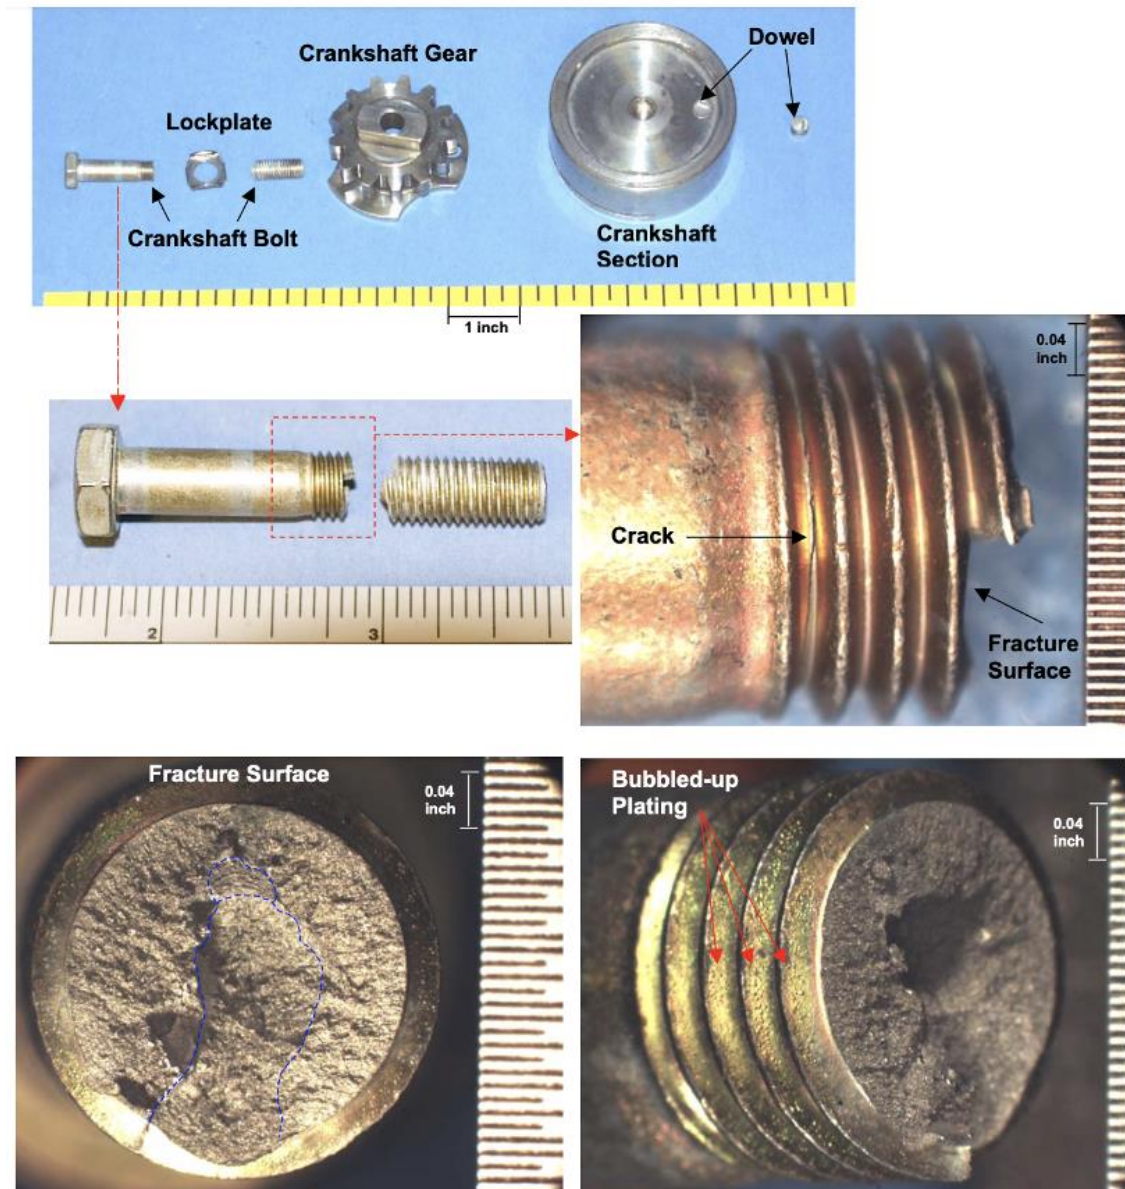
Image of the crankshaft assembly and fractured crankshaft gear retaining bolt after disassembly [212].
